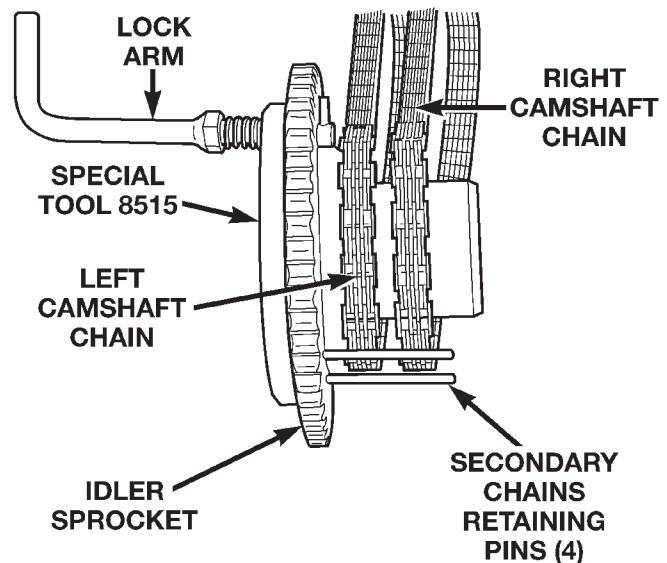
Using Special Tool 8515 to Hold Chains to Idler Sprocket.
